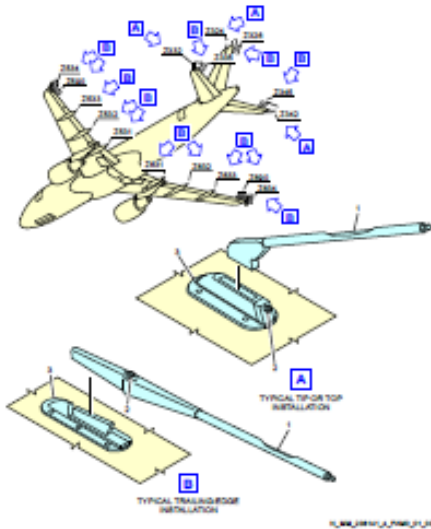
D (SHEET 1) - Static Discharger - Location and Detail
